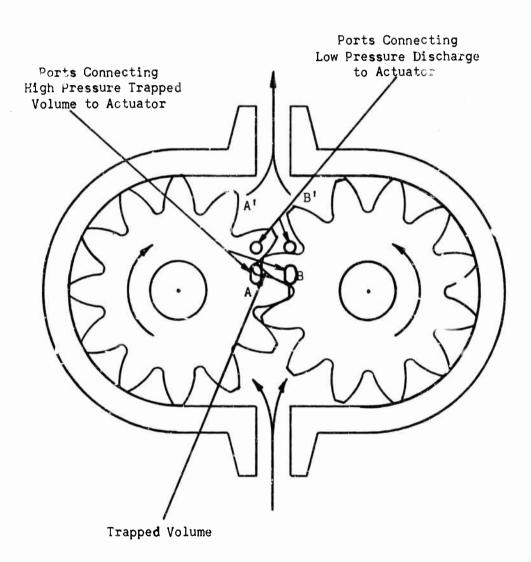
Hydraulic Gear Pump Pressure Pulse Generator
